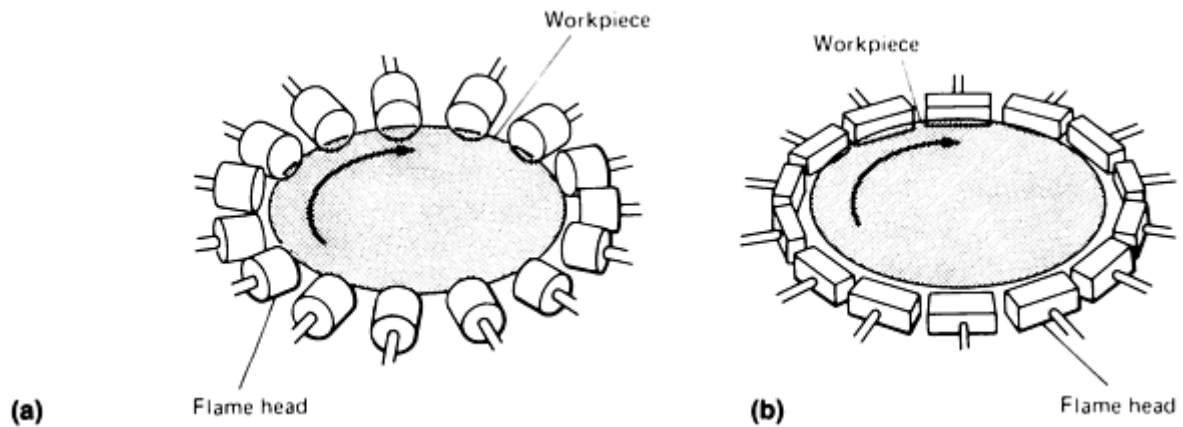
Setups for flame-hardening gears, idler wheels, and sprockets. (a) Radiant burners. (b) High-velocity convection burners. Wide-face parts can be heated with double or staggered rings of burners.
